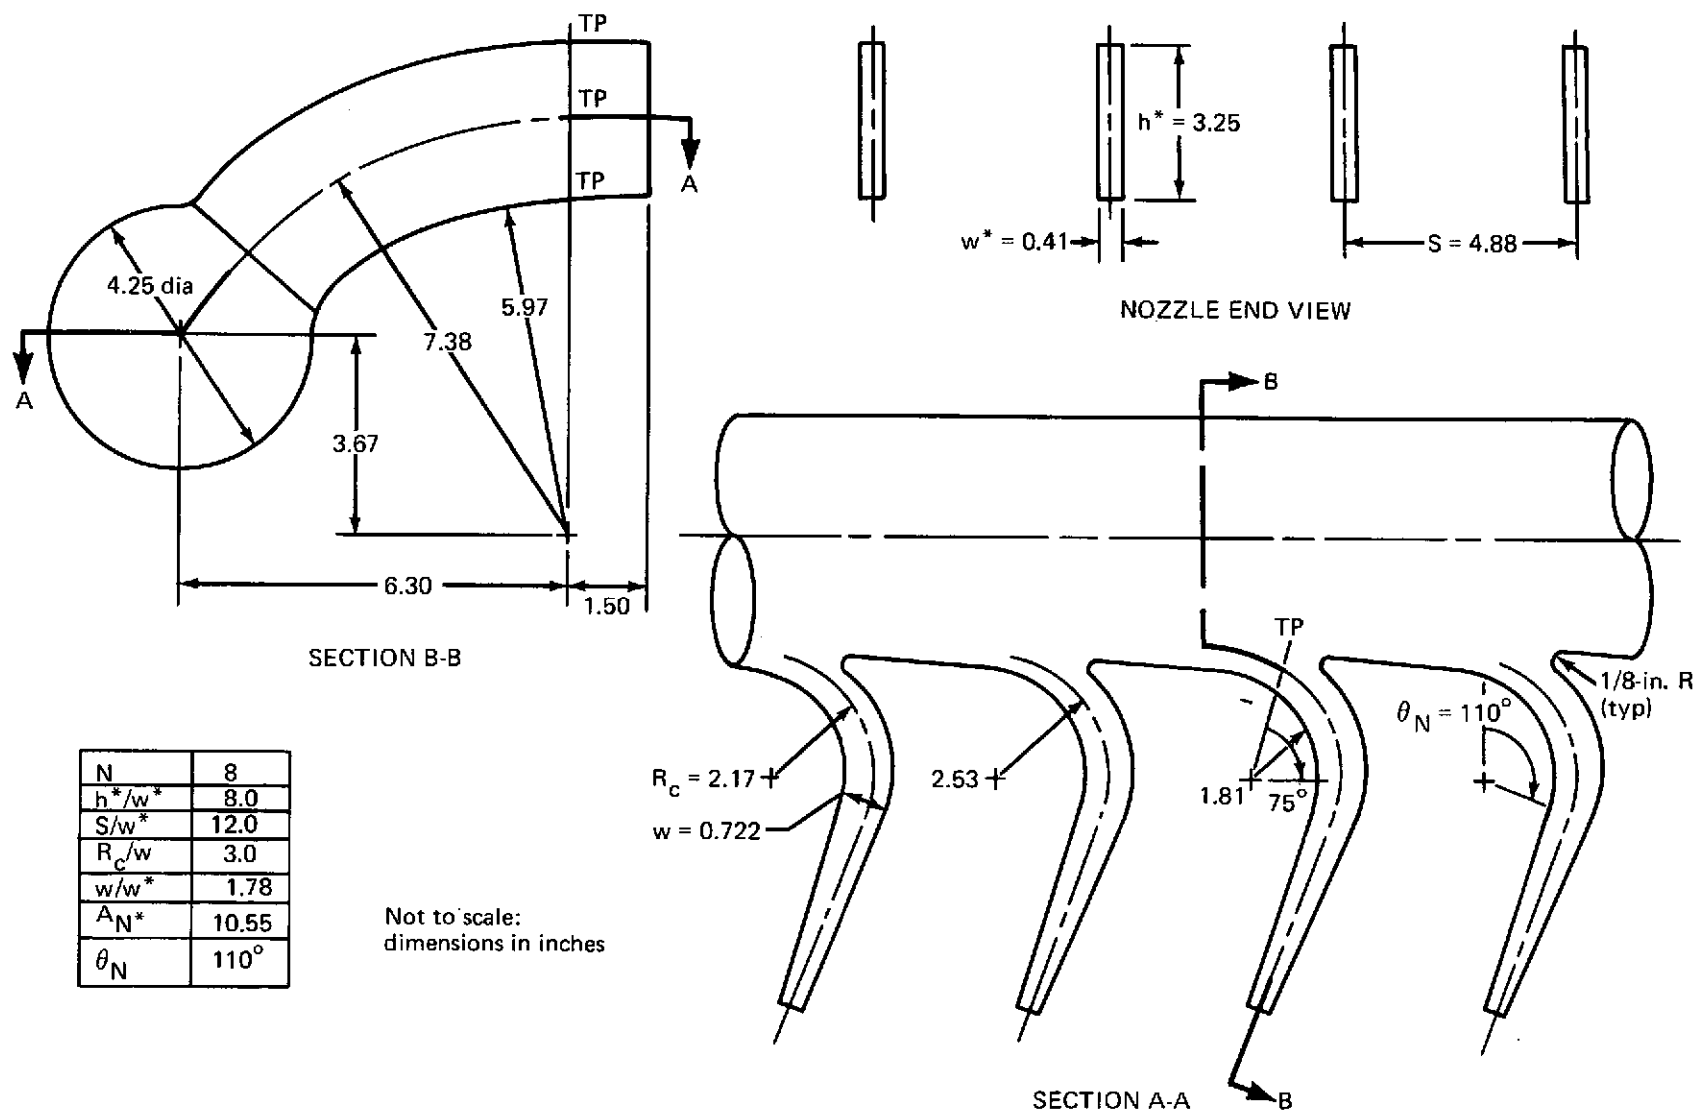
WING-DUCT NOZZLE ASSEMBLY DNA-3 DESIGN DETAILS
